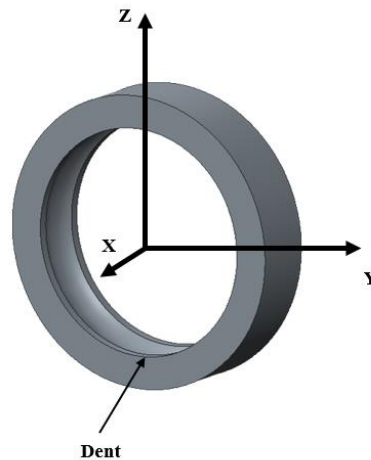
Location of dent created at the bottom of bearing outer race.
